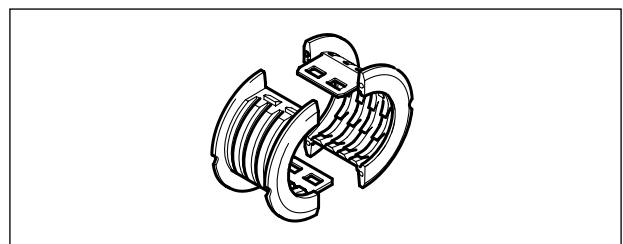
Pipe bracket lining shell, art. no. 603.702.00.1
